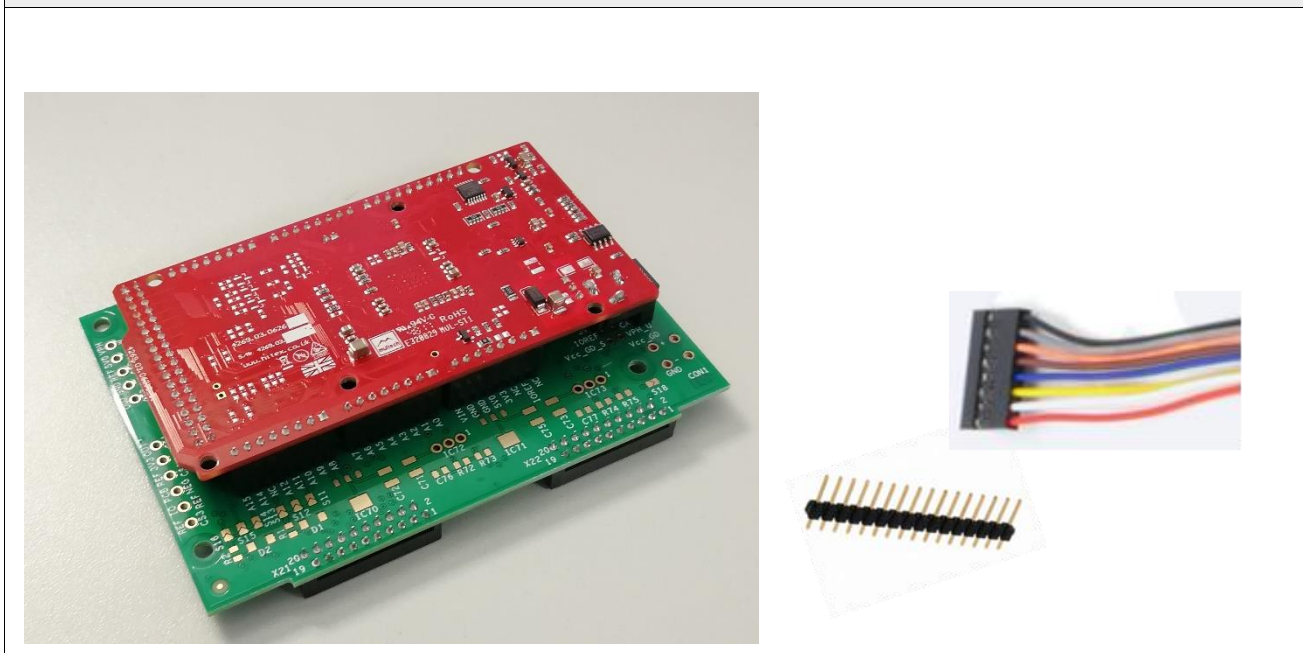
Examples: controller assembly on eval-kit adapter board (left) / suitable connectors for cable connections (right)
